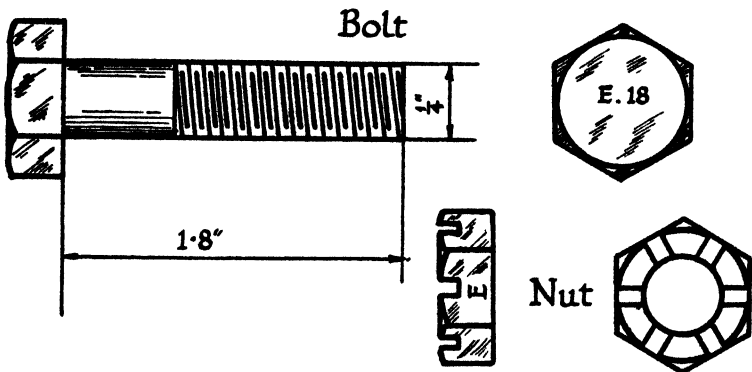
MARKING ON B.S.F. BOLT AND NUT
